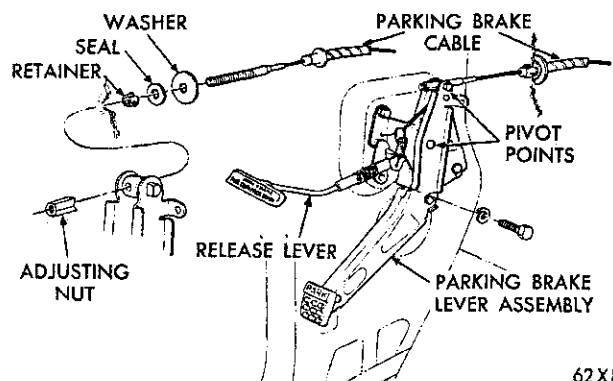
Parking Brake Pedal, Lever and Cable Assembly (Models SC-1, SC-2, SC-3)
